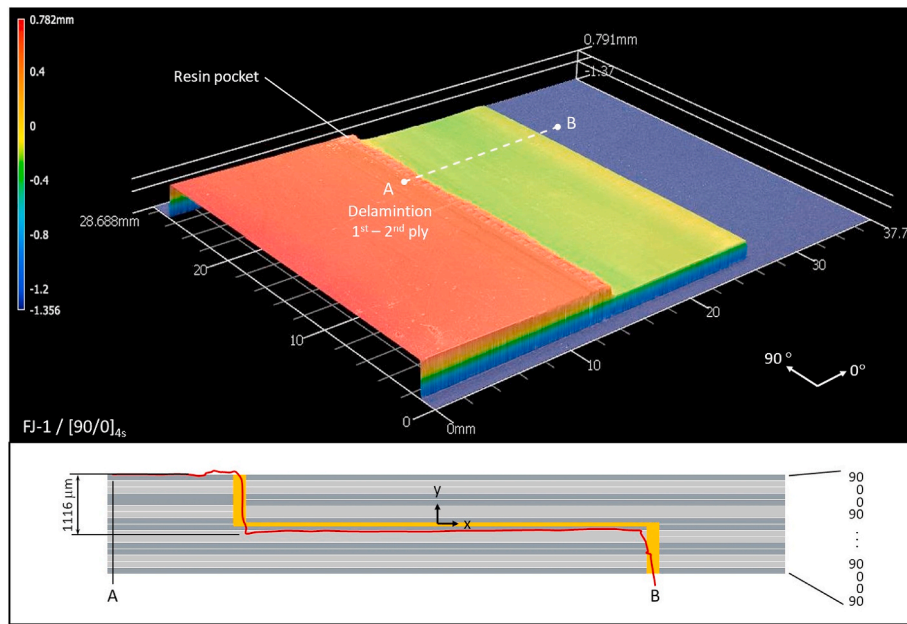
Final fracture surface of a typical FJ-1 topology in layup $[90/0]_{4s}$.
